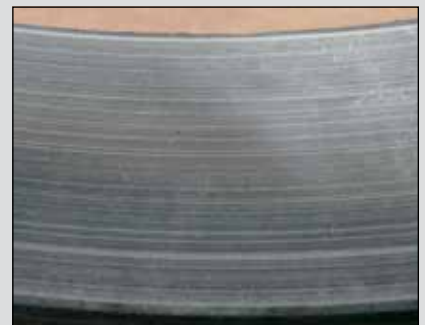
Horizontal grooves cause improper rolling contact, reducing bearing life.
